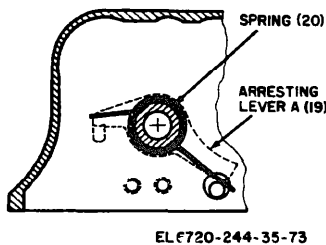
Spring location (spring 20) from fig. 3-15.
